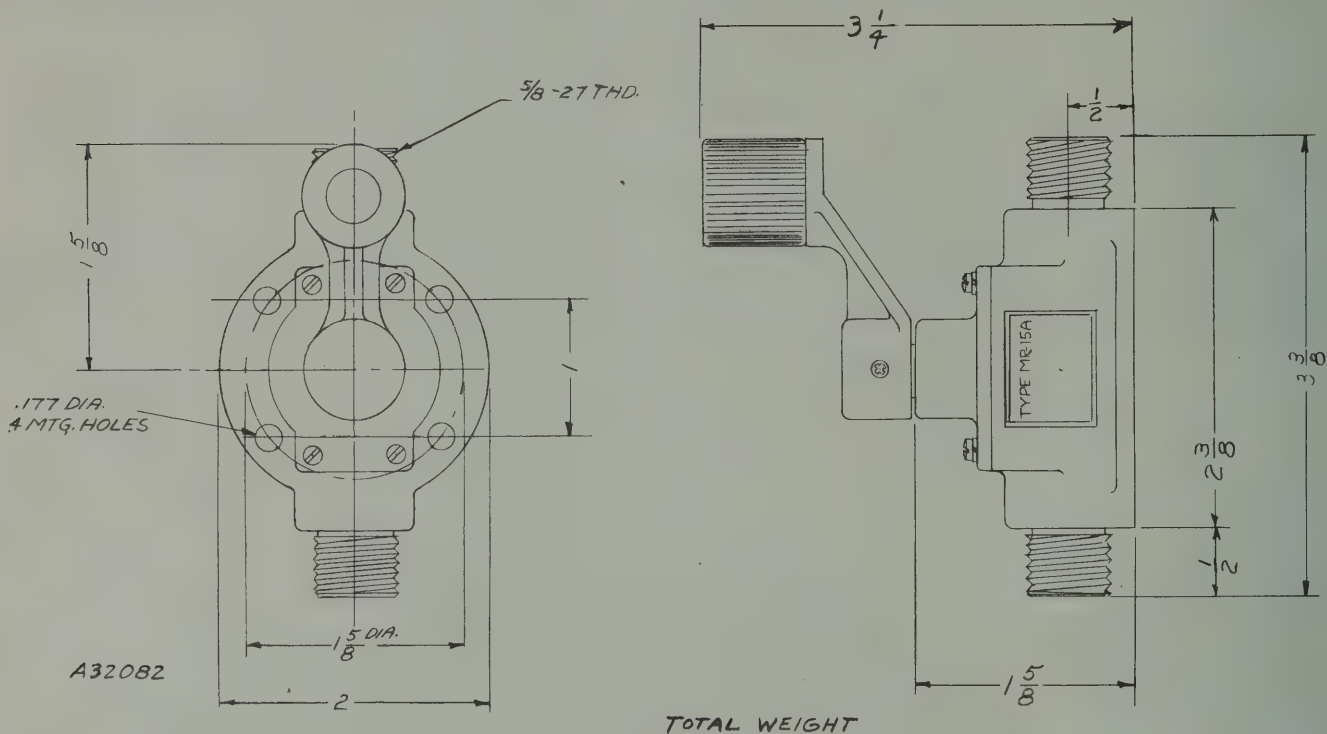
TYPE MR-15A CRANK DRIVE, OUTLINE AND MOUNTING DIMENSIONS
